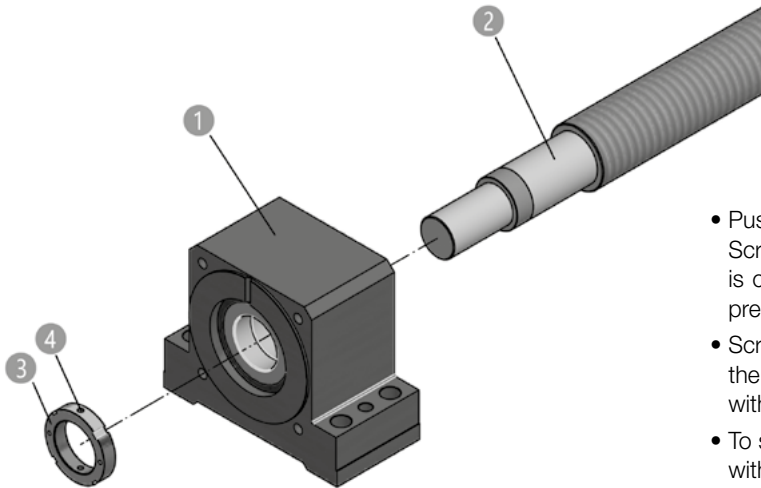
Assembly of axial angular contact ball bearings type BST
